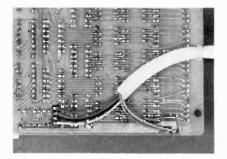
PHONE CABLE connections. Solder the wires directly to the foil side of the board.
